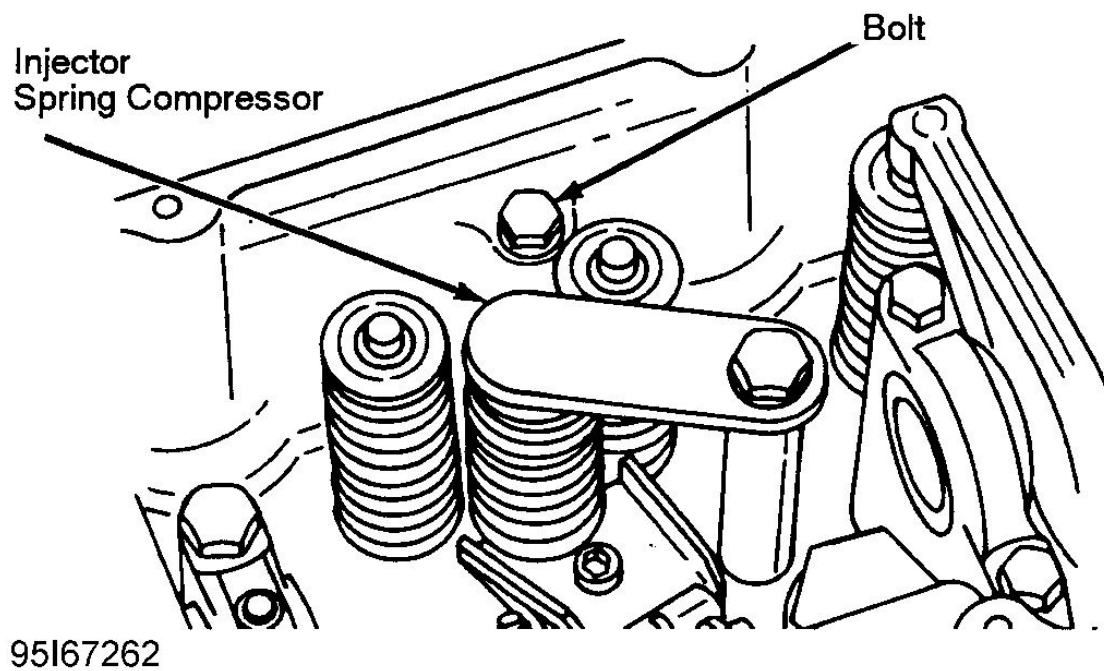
Removing Cylinder No.1 Rocker Arm Assembly
